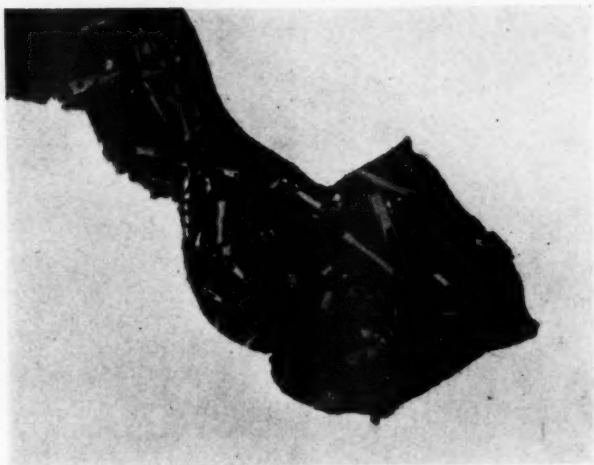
LARGE, TYPICAL SLAG INCLUSION IN STEEL CASTING
